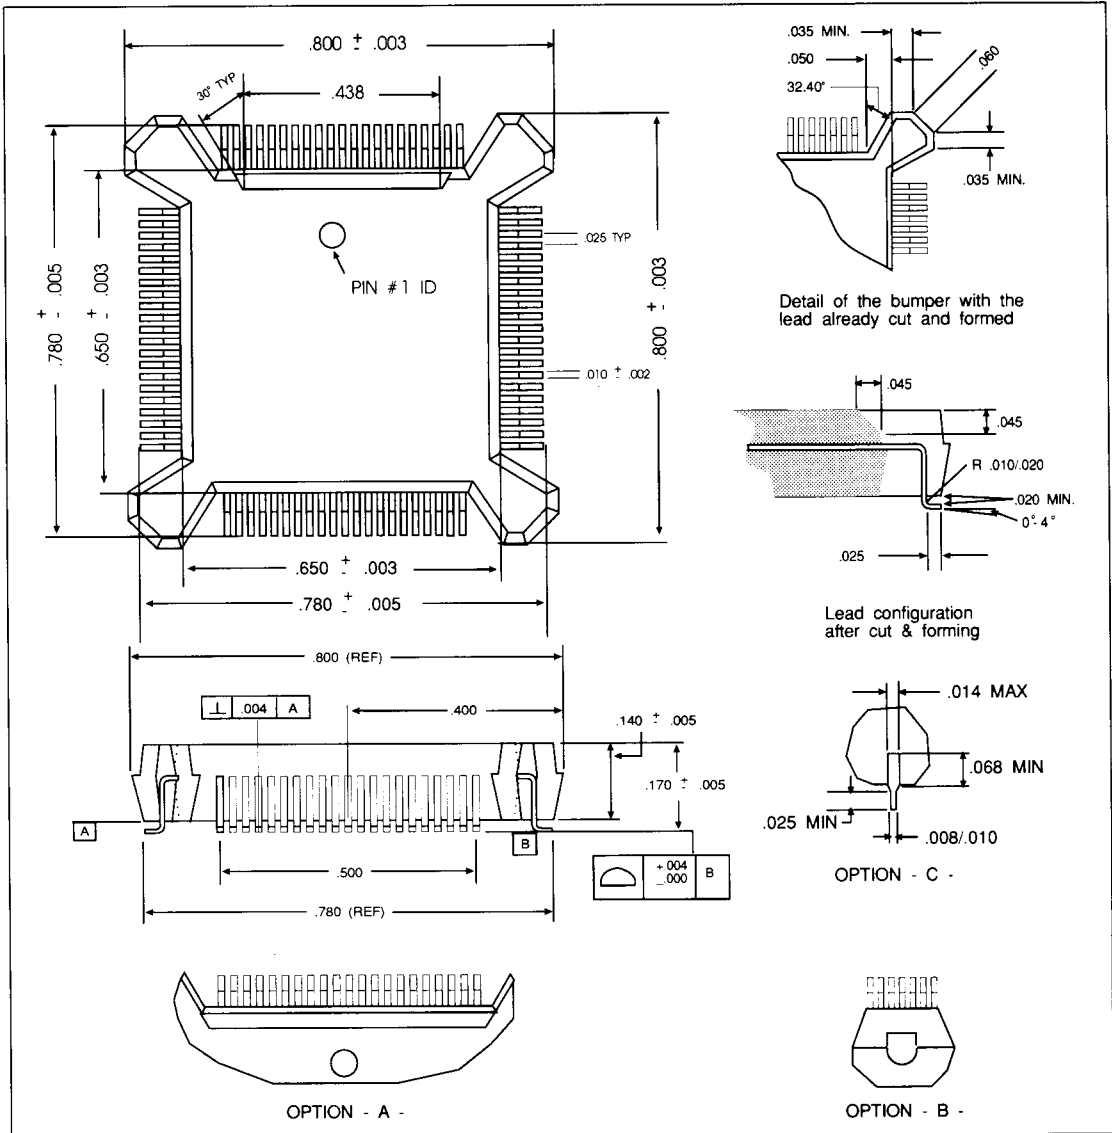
84-PIN PQFP PACKAGE DIMENSIONS
